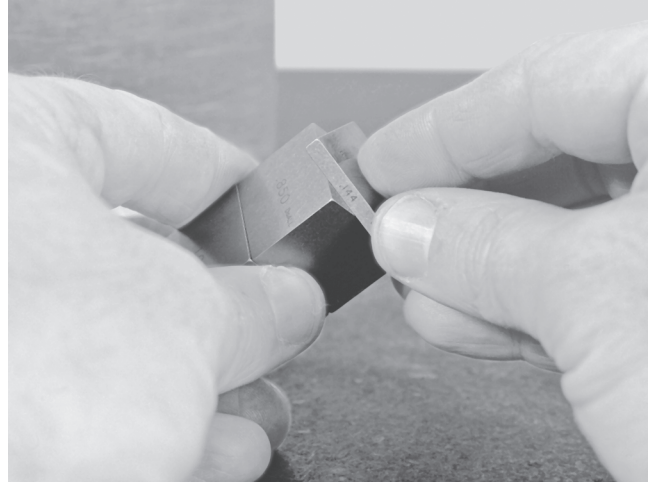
Wringing the gage block stack for the sine bar elevation.
